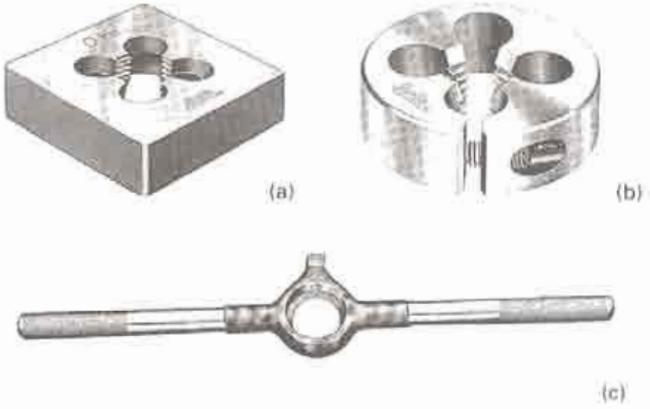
(a) Solid threading die; (b) solid-adjustable threading die; (c) threading-die stock for round die (die removed). (Courtesy of TRW-Greenfield Tap & Die.)
